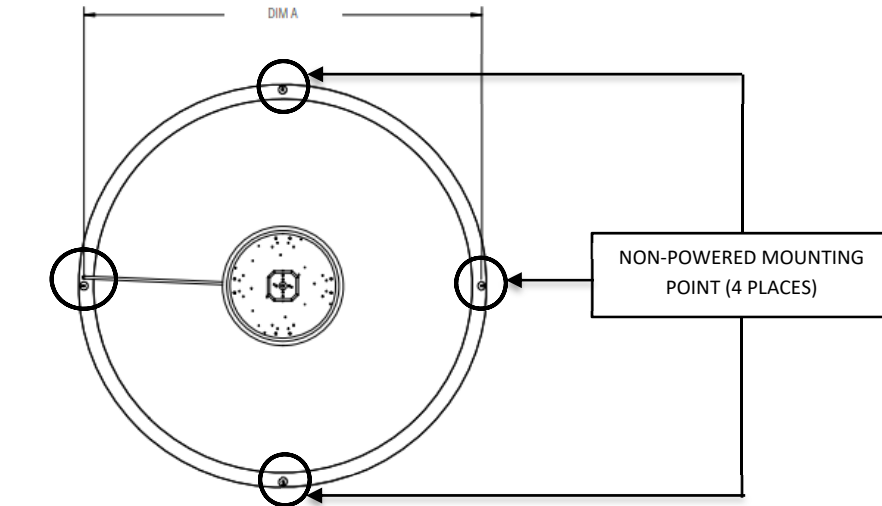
TOP VIEW SHOWING MOUNTING VIEW INFORMATION
